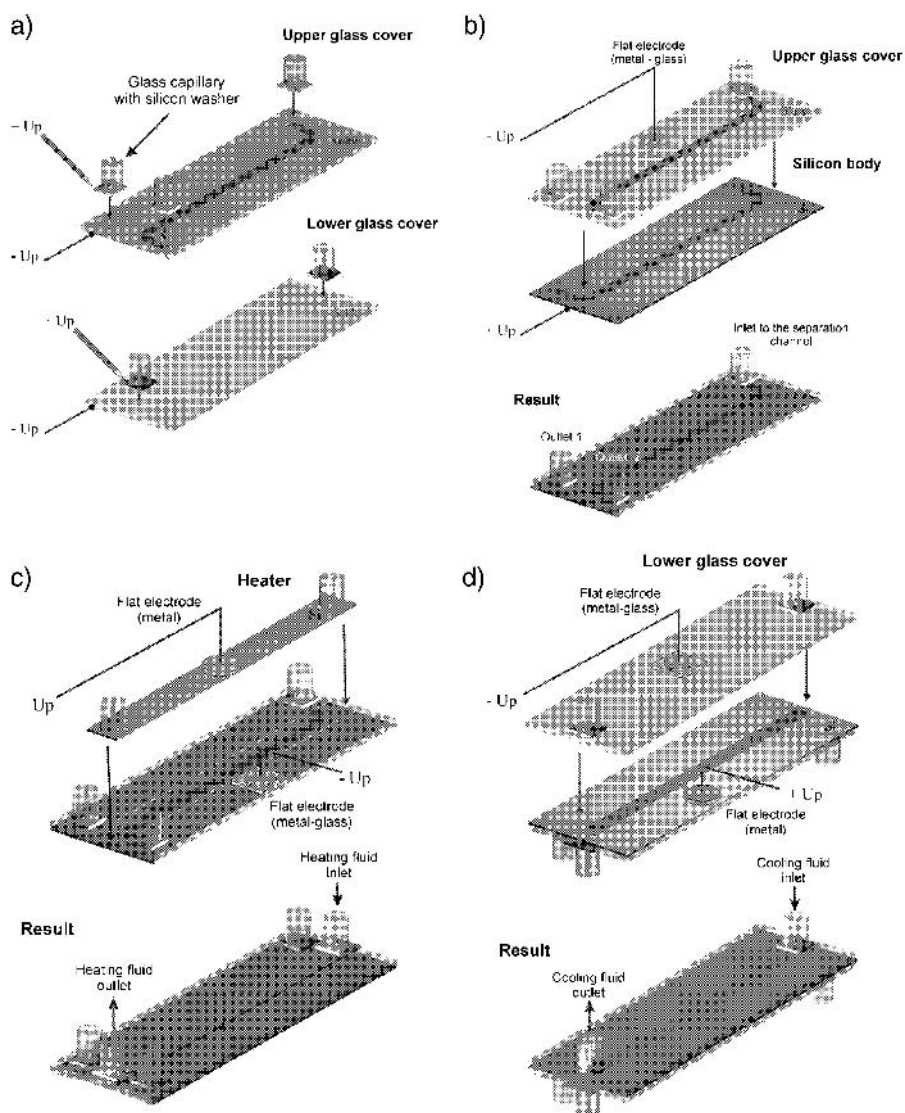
Step-by-step assembly procedure of a μ TFFF device: a) outlets bonding, b) separation channel forming, c) heater bonding, d) bottom glass bonding.
